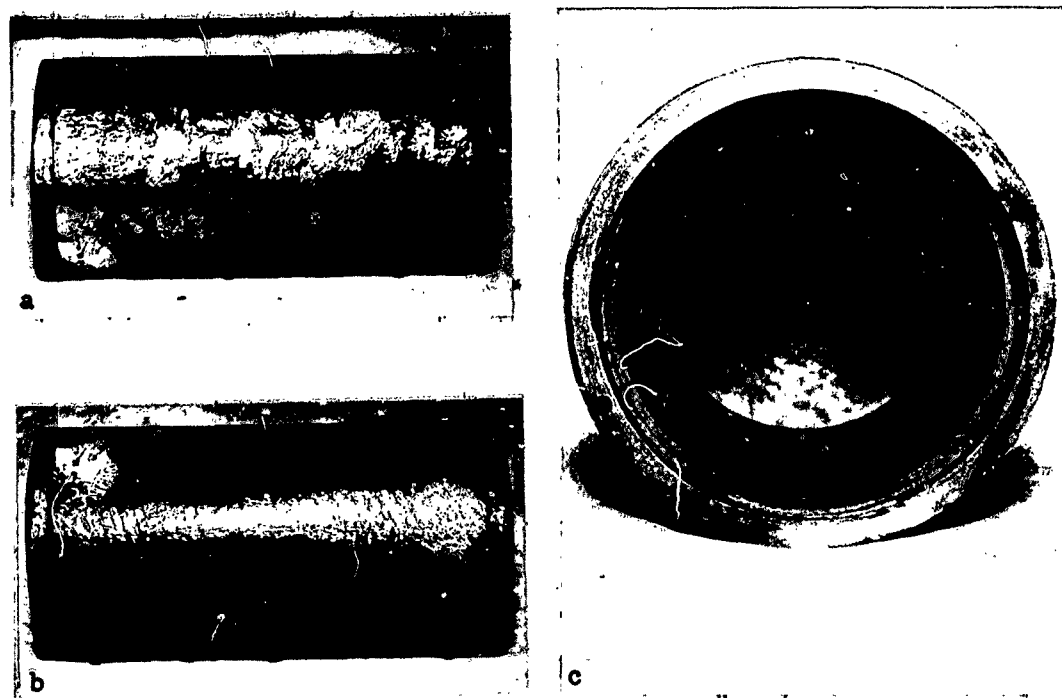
Cylinder From Tower 4, Right Side, 4-in. Hole. (a) Side with Shiny Metal Splashes; (b) Side Opposite Shiny Metal Splashes (Note white spot is paint); (c) End View.
